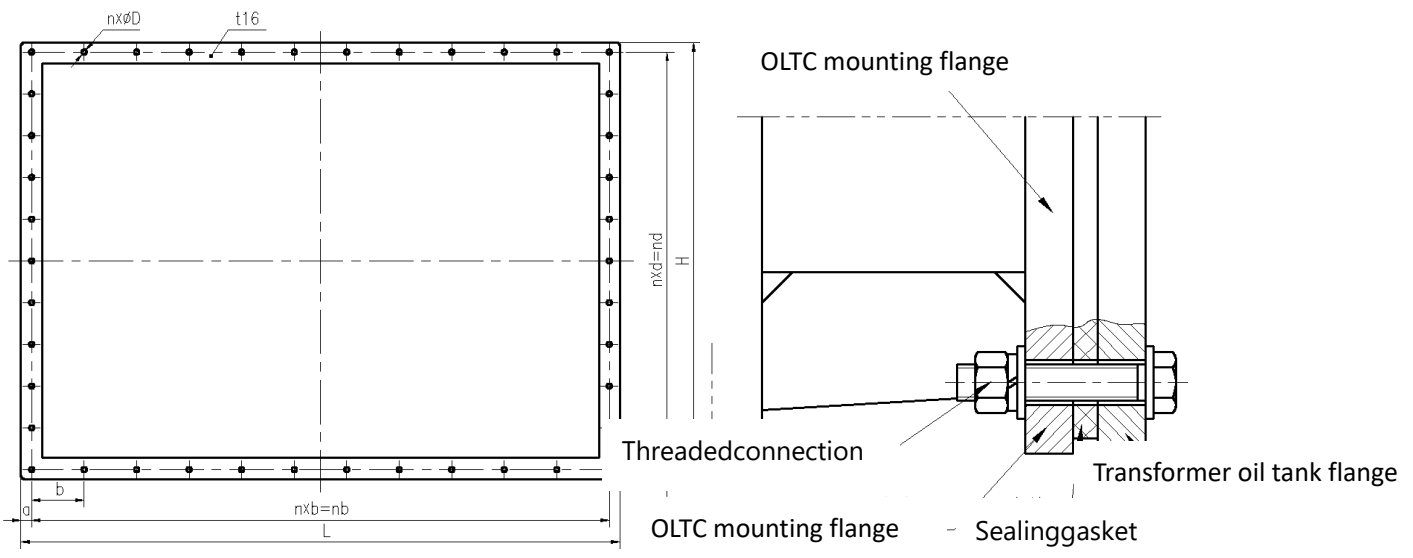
Connection and fixation of transformer tank and tap changer compartment by screw thread
